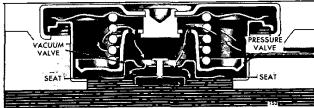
Pressure Control Cap (Vacuum Valve Open)
